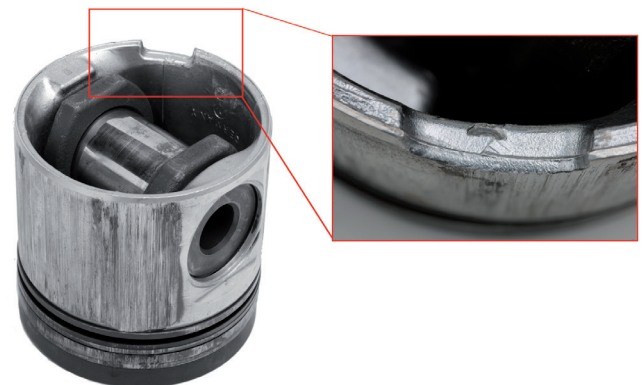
Noticeable marks on piston skirt indicate cooling nozzle impact
